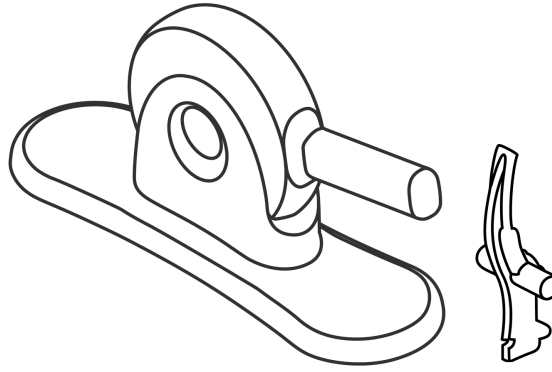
Edwards Crimper and 2-piece Crimp Stopper
